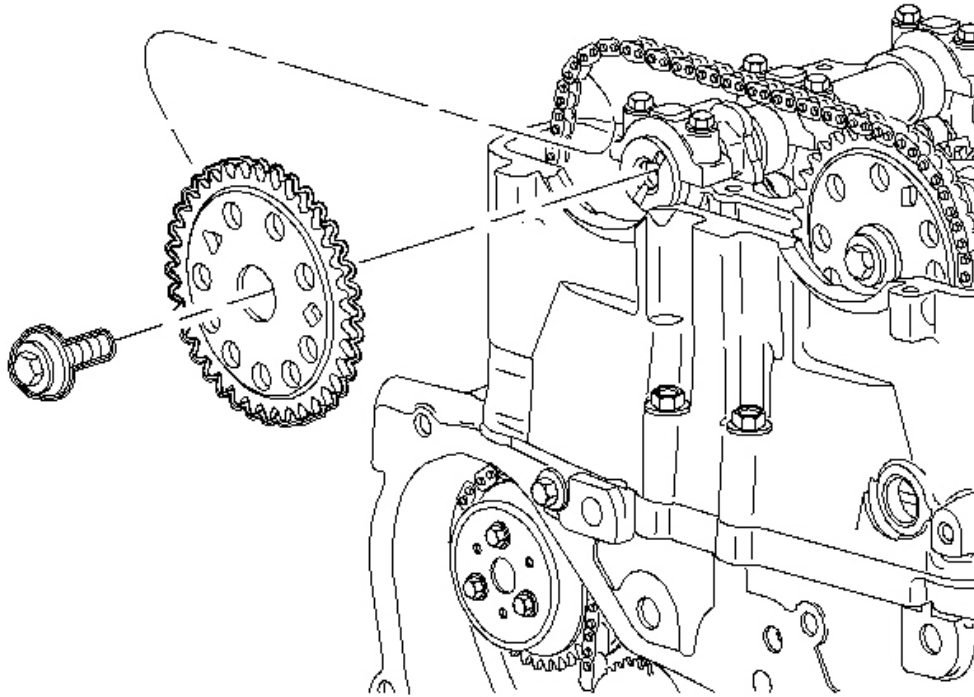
Removing/Installing Camshaft Sprocket Bolt
